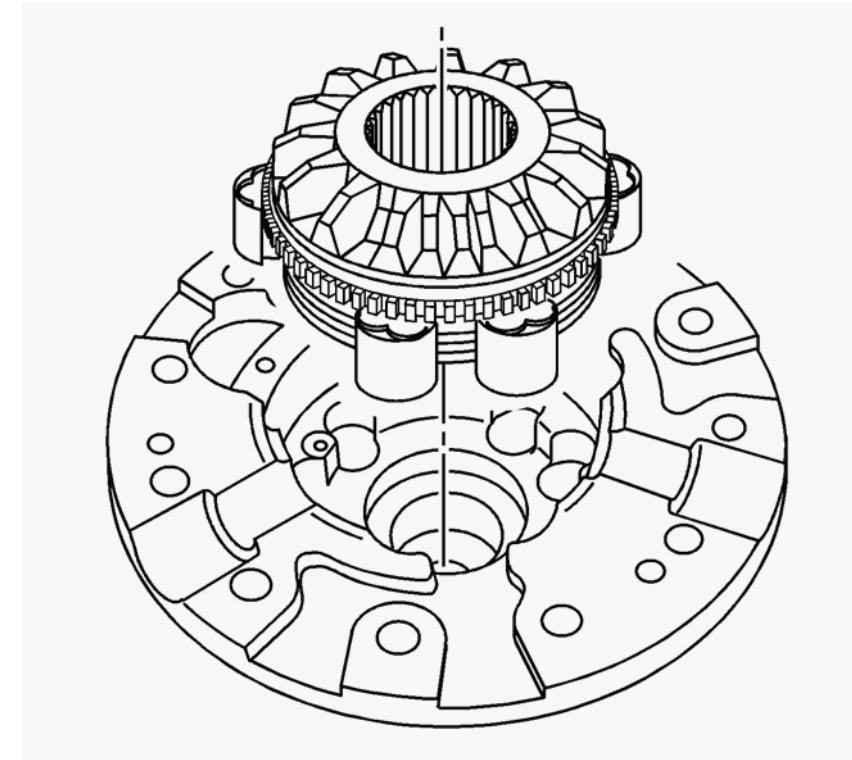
Right Side Cam Unit And Clutch Plate Assembly
